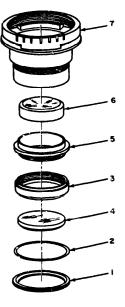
50-mm lens head, partial exploded view; and focusing scale, exploded view.
